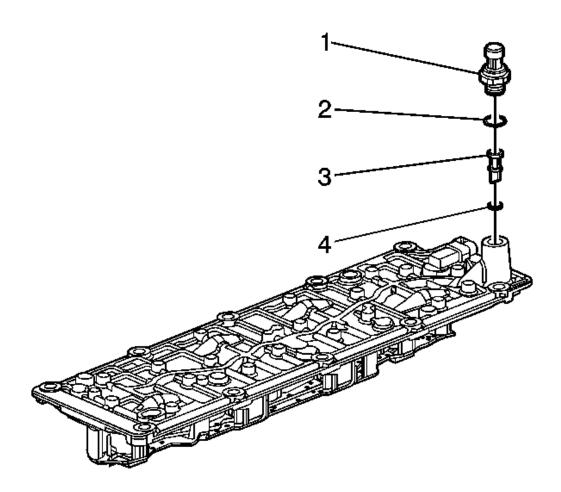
View Of Oil Pressure Sensor Courtesy of GENERAL MOTORS CORP.
